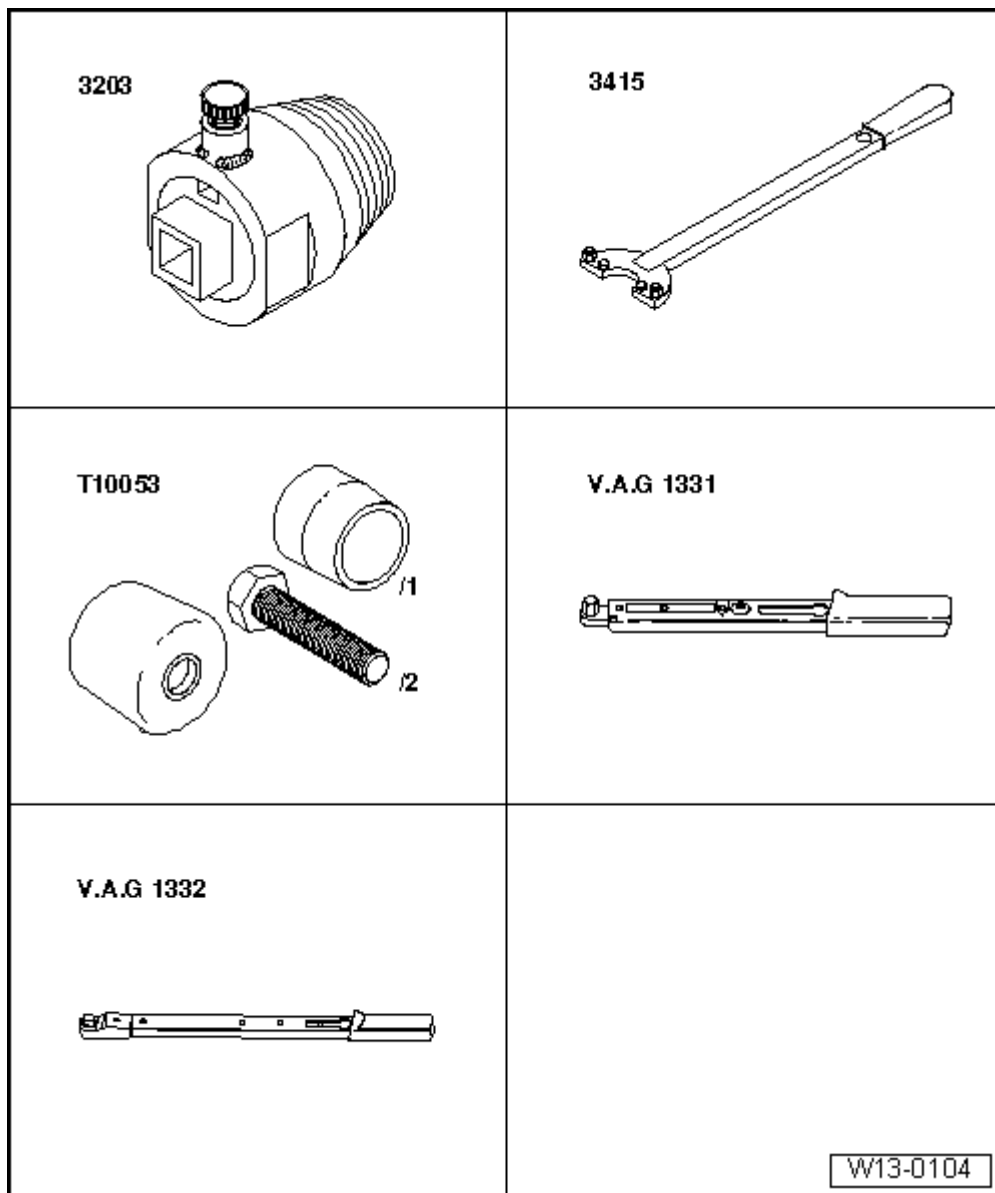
Identifying Special Tools -- Crankshaft Seal, Ribbed Belt Side, Replacing
